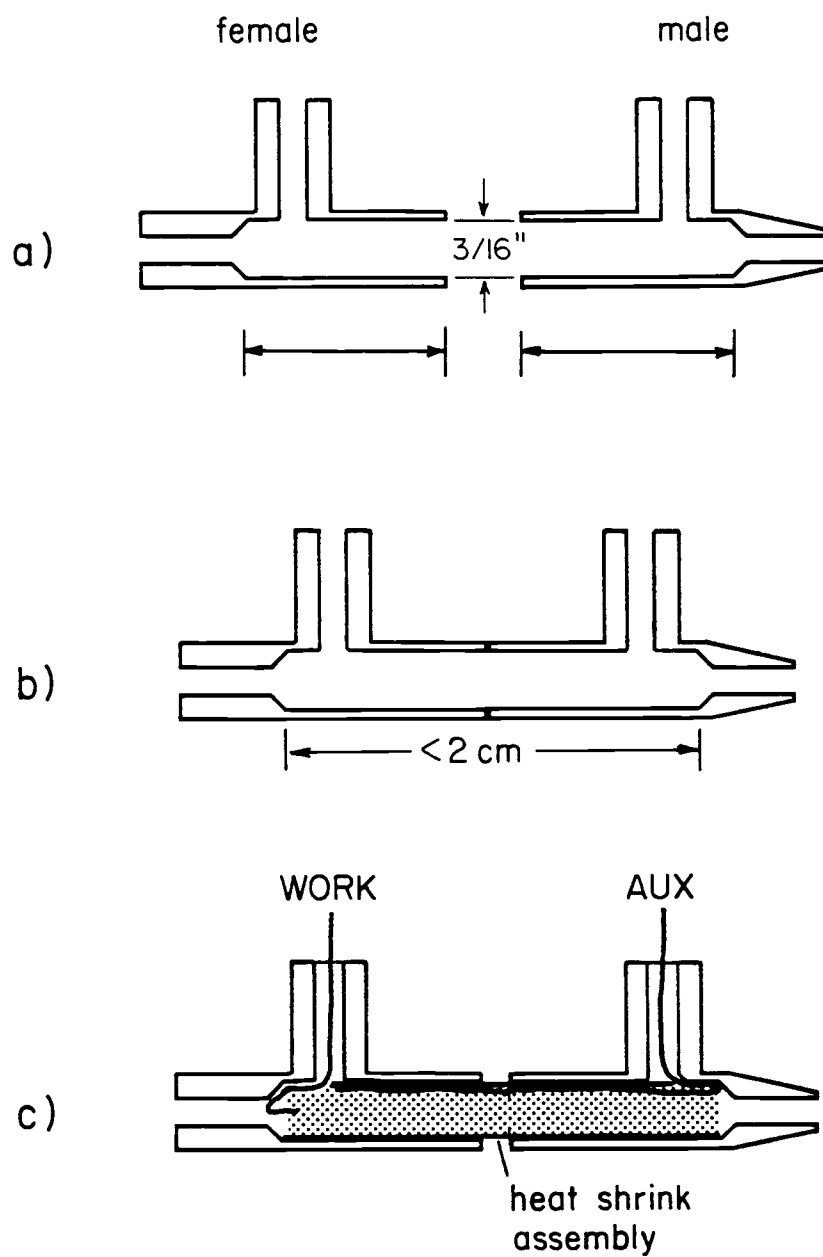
Final Assembly Details. (a) Female and male tees, arrows show length of $3/16"$ boring, (b) shortened to less than 2 cm, and (c) final assembly orientation showing routing of Pt leads.
